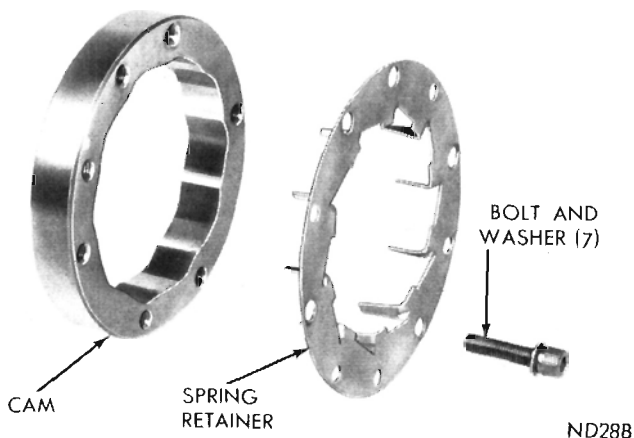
Overrunning Clutch Service Replacement Cam (A-904)
